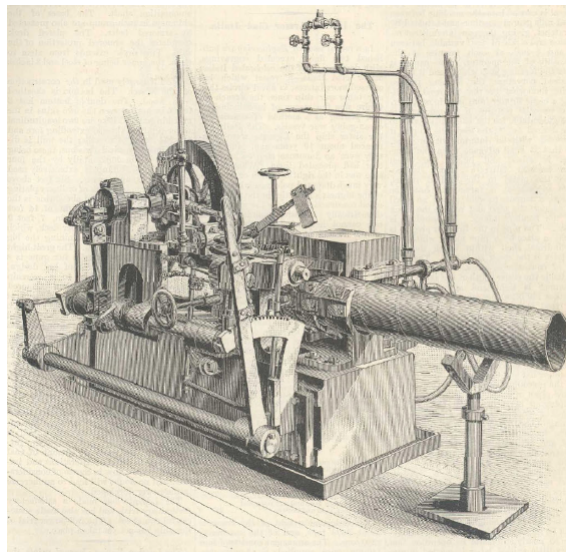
Machine for the manufacture of spirally welded tubing [10].
